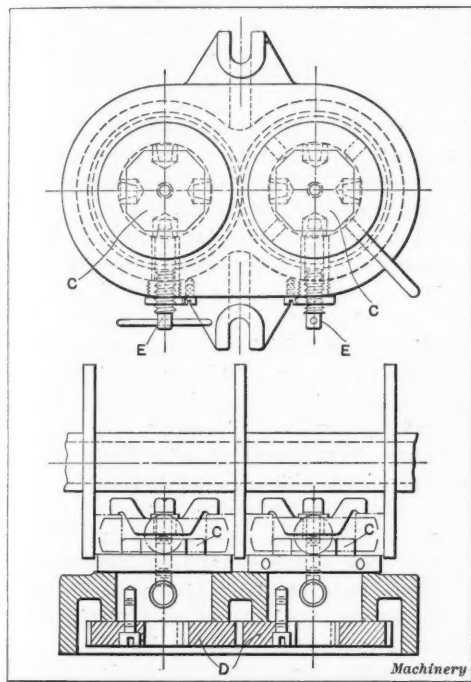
Duplex Fixture for use in milling the Outside Faces of the Forgings
